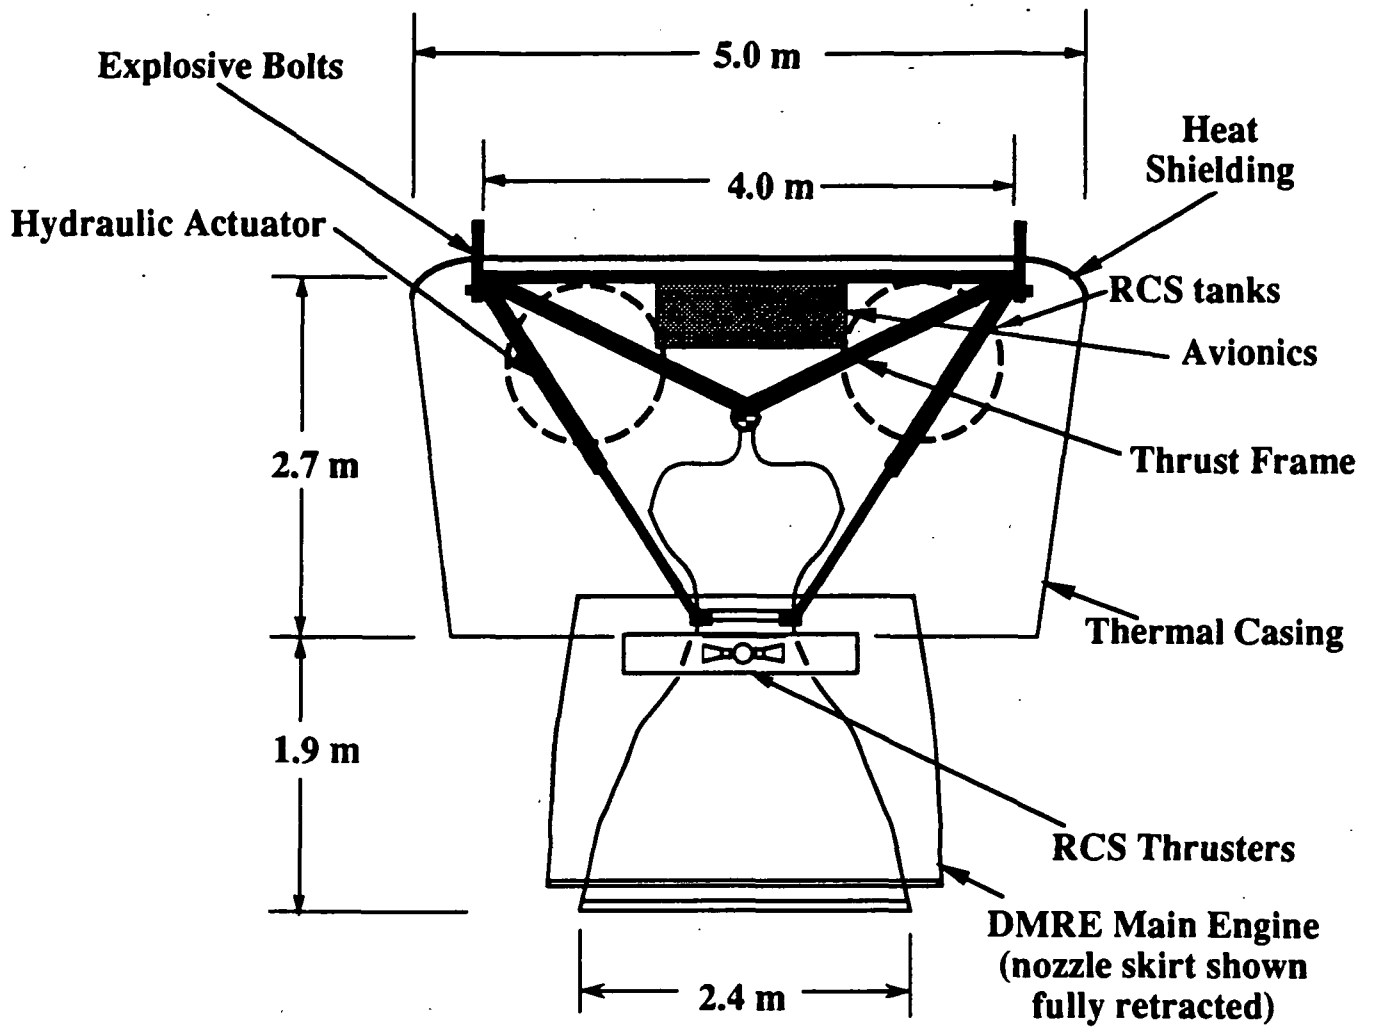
Schematic cutaway view of Engine Return Unit (ERU) : GEO configuration.
